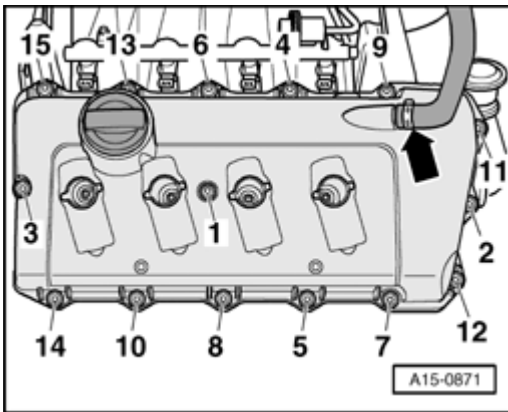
Disconnecting Hose Of Crankshaft Housing Ventilation & Removing Left Cylinder Head Cover Bolts In Sequence
